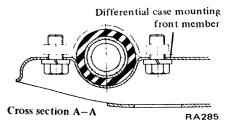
Cross-sectional view of transverse link inner bushing (II)
